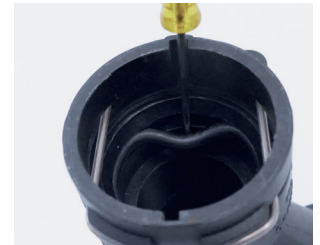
Remove and replace the old seal in the flange using a suitable tool.
